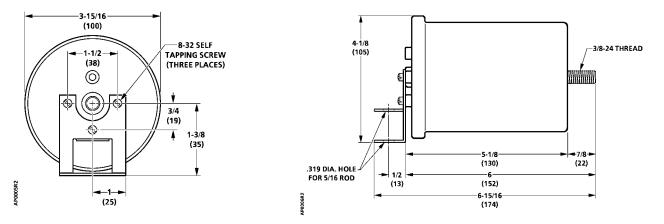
No. 3 Actuator with Pivot Mounting Bracket Dimensions. Dimensions are in Inches (Millimeters).
